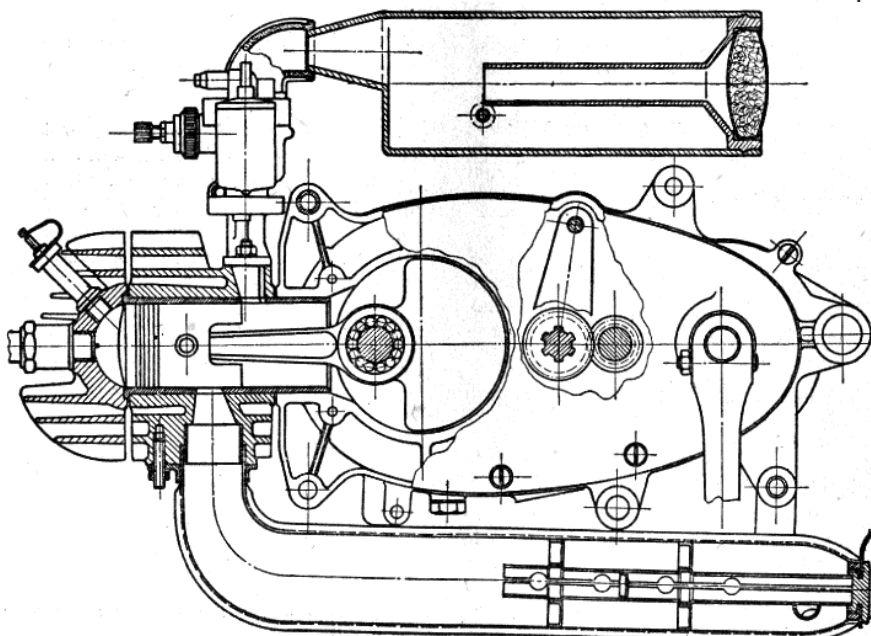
View of the 50 c.c. Jawa moped engine sectioned in the horizontal plane. Above right is a detailed drawing of the gear selecting mechanism.
